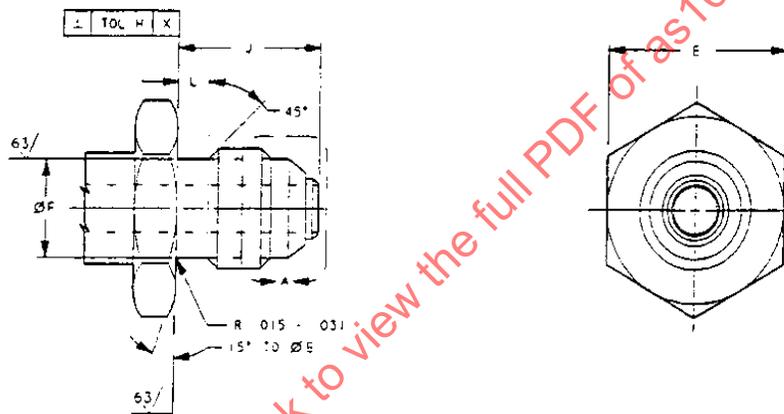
FITTING END, SEAL RING, STYLE E
